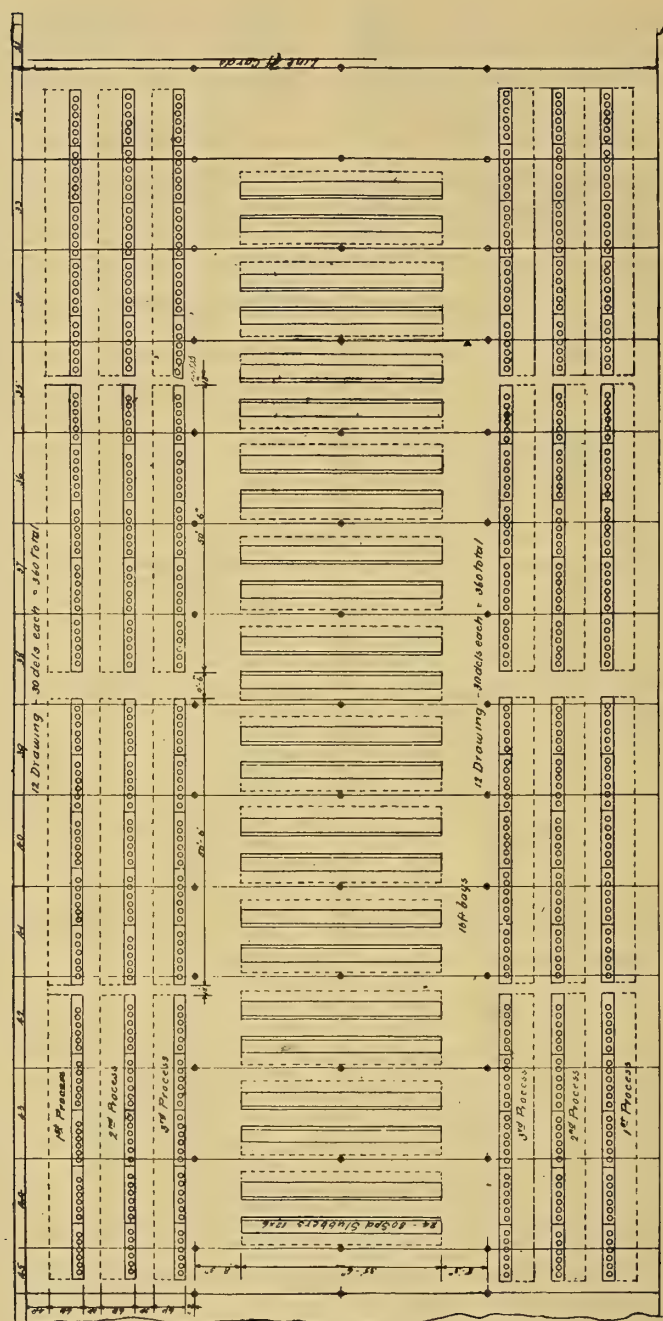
Arrangement of Slubbers and Drawing Frames.
